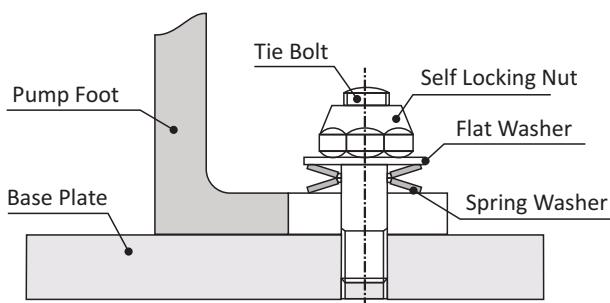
Mounting the pump on the base plate which will be operated at high temperature.
